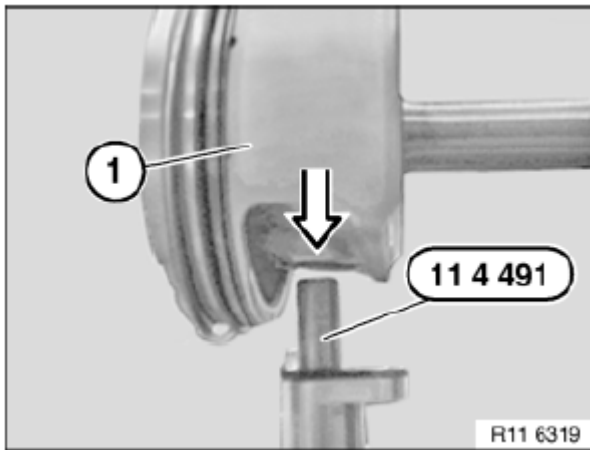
Identifying Special Tool (11 4 491) And Piston
